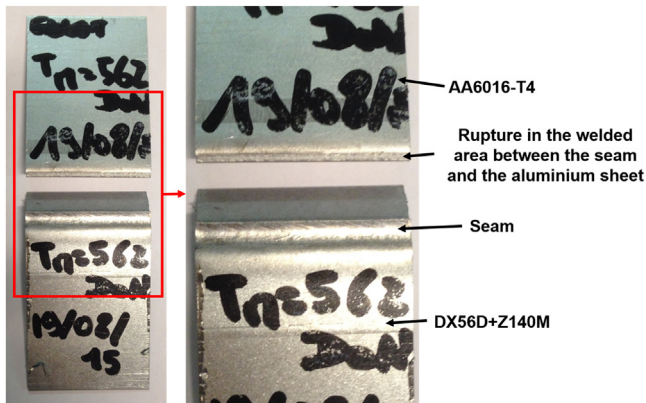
Rupture in the welded area, between the seam and the aluminium sheet.
